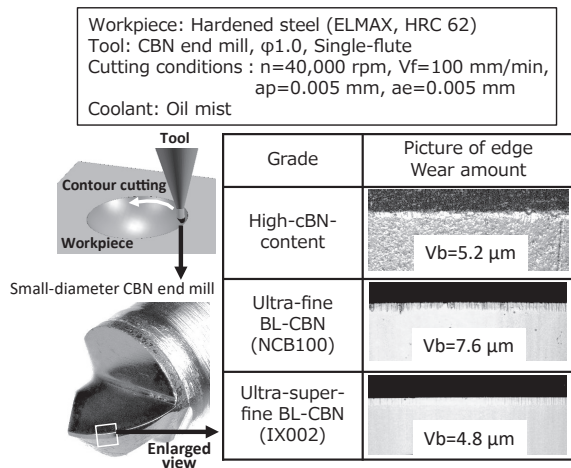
Example of mold machining with SUMIBORON BINDERLESS end mill
